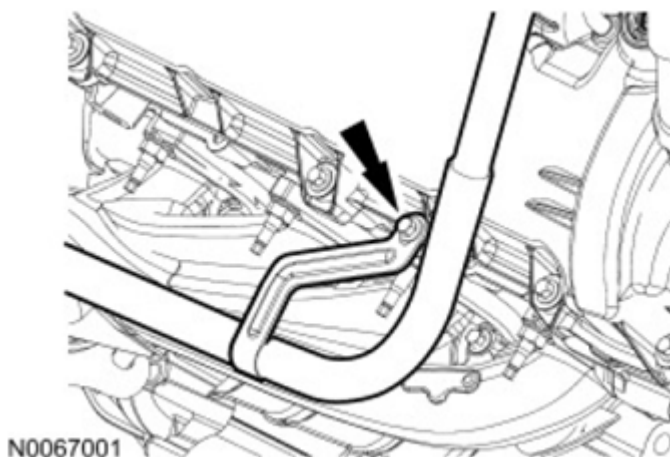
Locating Transmission Fluid Level Indicator Tube And Bolt
